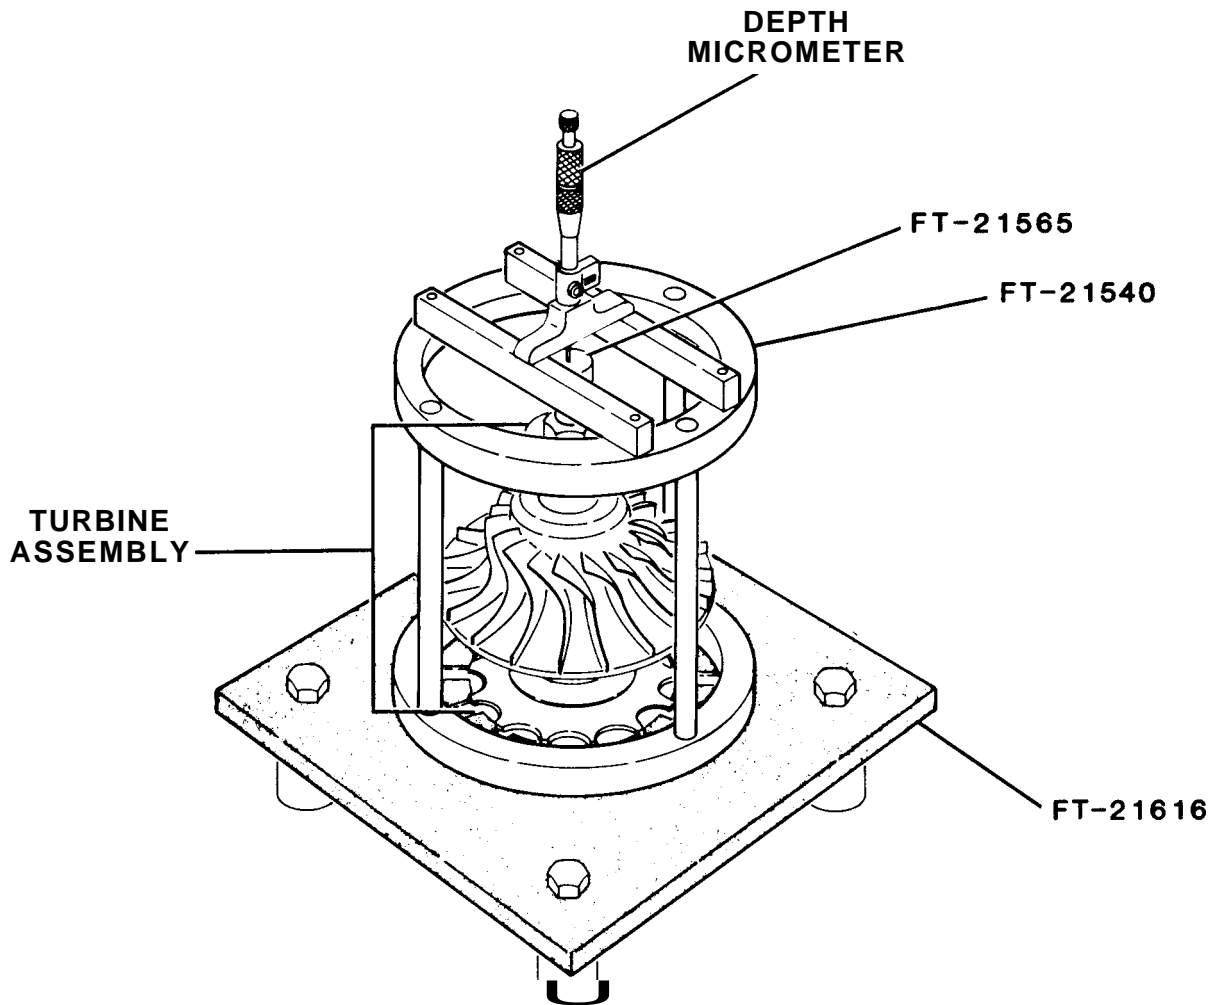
Obtaining Reading for Turbine Shaft Stretch Using Fabricated Tools FT-21540 and FT-21565
